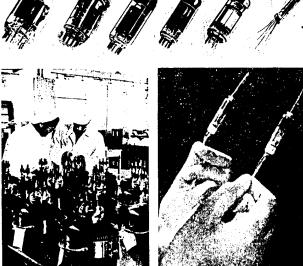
TESTING A TELEVISION TUBE AT NANKING ELECTRON TUBE PLANT
